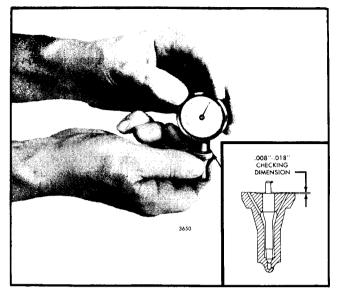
Checking Needle Valve Lift with Tool J 9462-02
